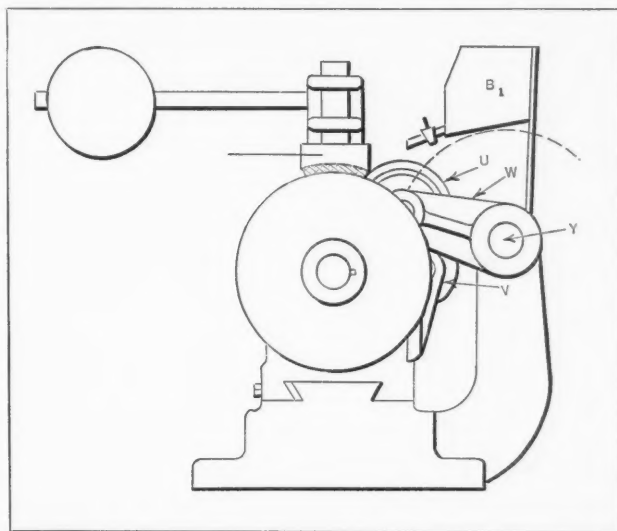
Right-hand End View of Machine Shown in Fig. 3
